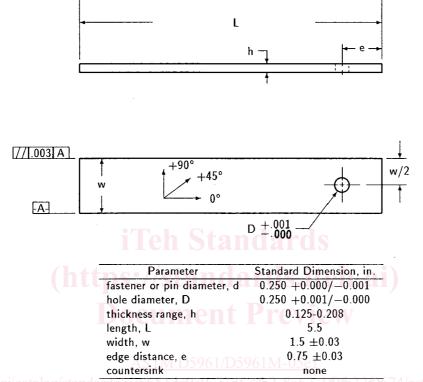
Double-Shear Test Specimen Drawing (Inch-Pound)
